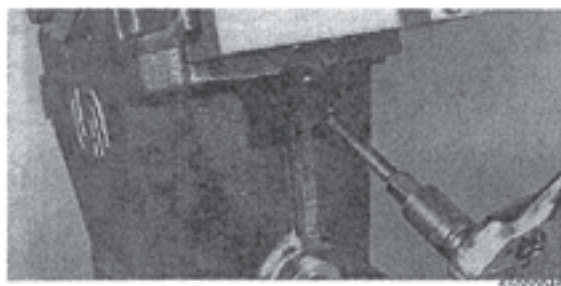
Adjusting Charge Pressure Relief Valve
